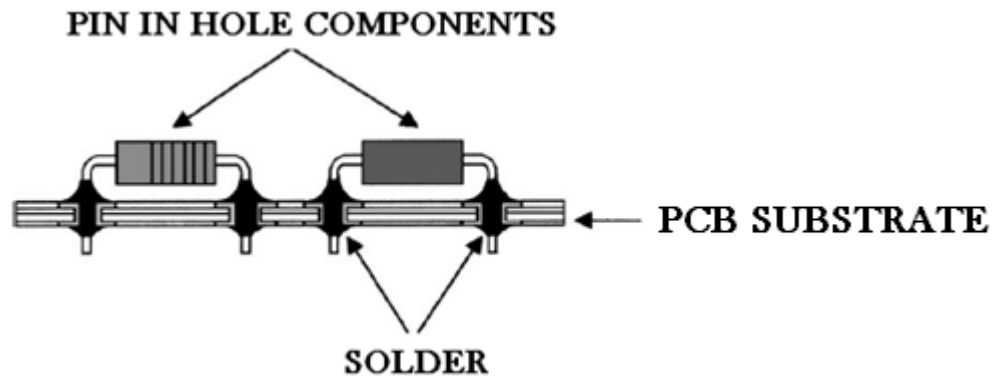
Cross section of pin through hole connection of a microelectronics component on a printed wiring board [13]
